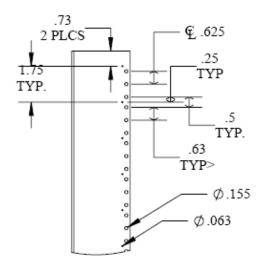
DETAIL "F" OF THE RACK RAIL DETAIL FROM THE PREVIOUS PAGE
